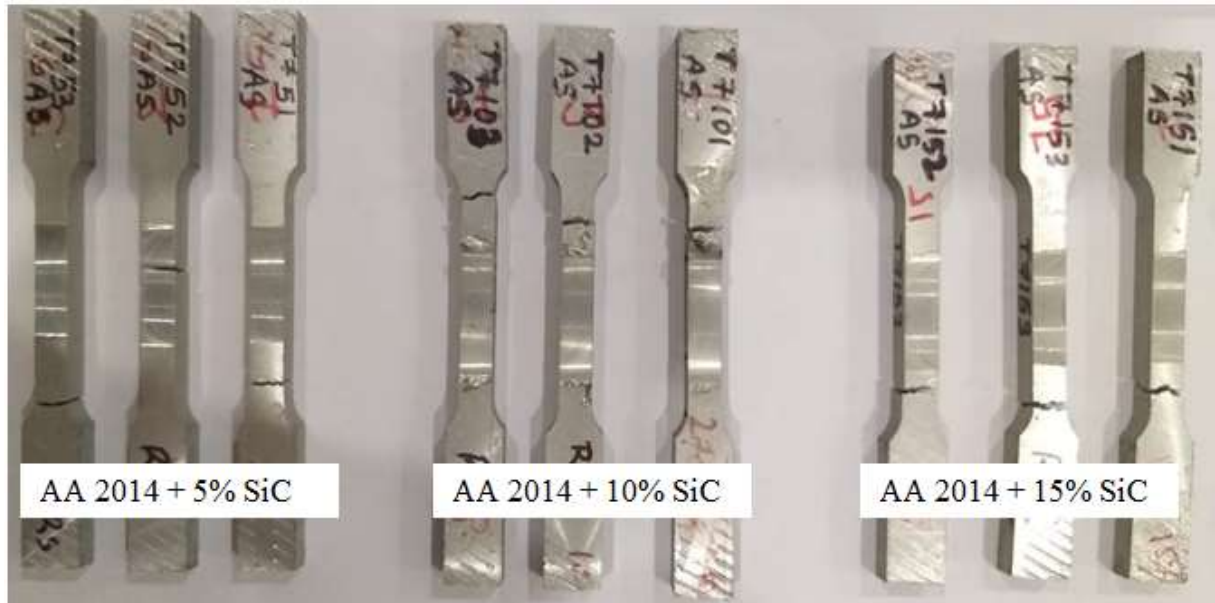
Friction stir welded specimens after performing a tensile test
